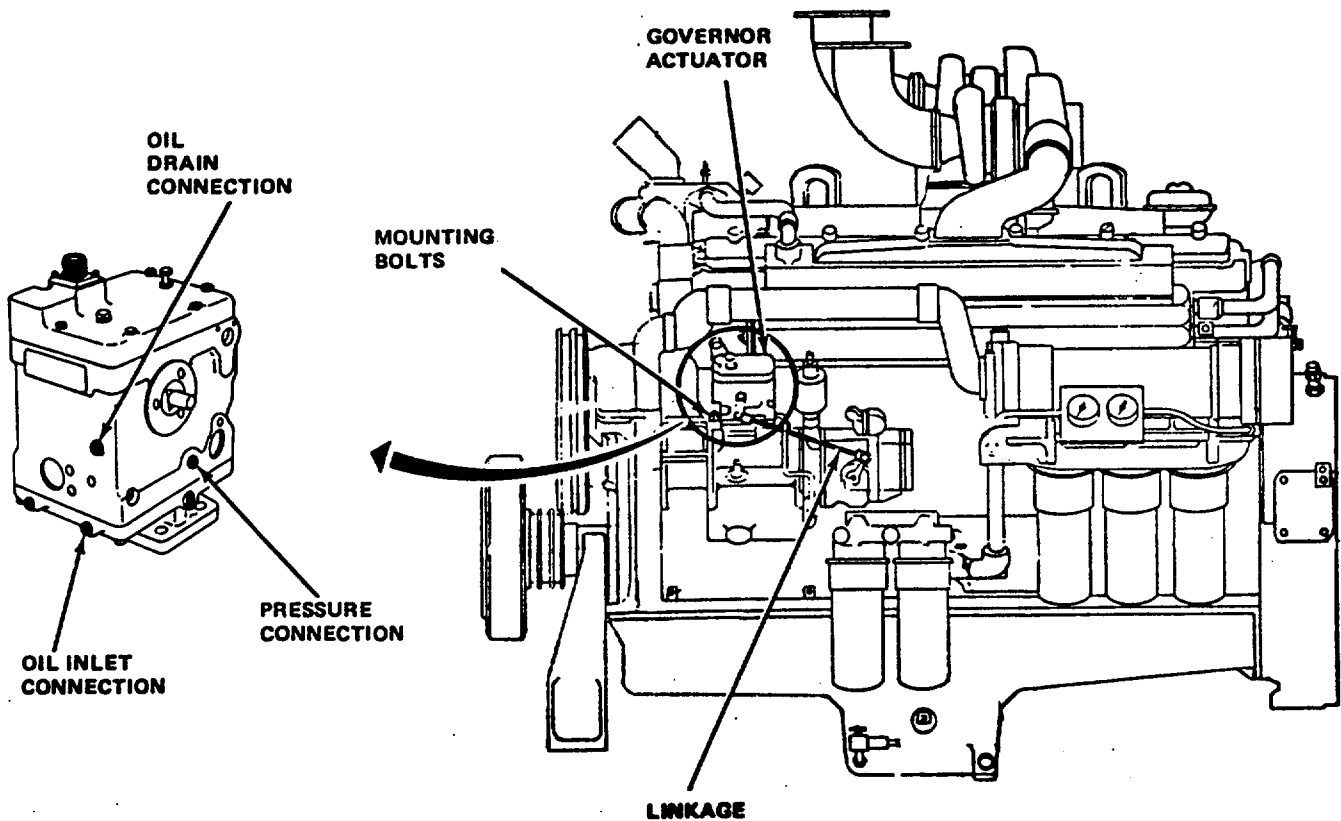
Governor/Actuator Mounting on Engine and Actuator Test Connections
